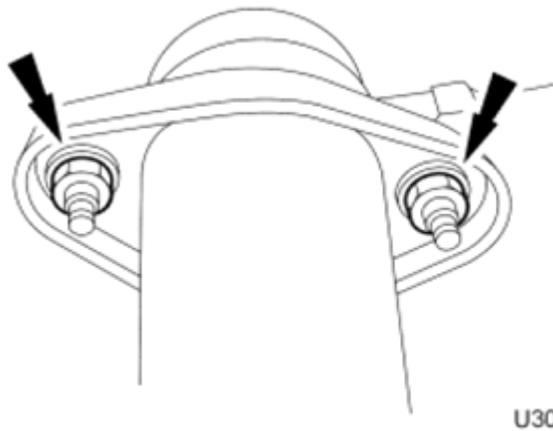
Identifying Exhaust Manifold Flange Nuts
